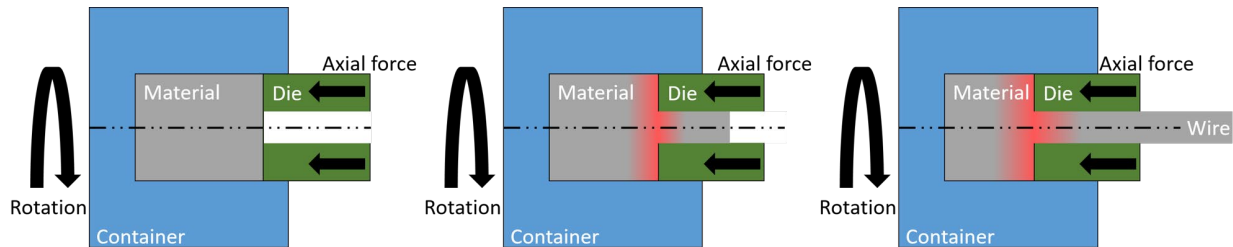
Illustration of the FE process, including two machine parts, container and die.
